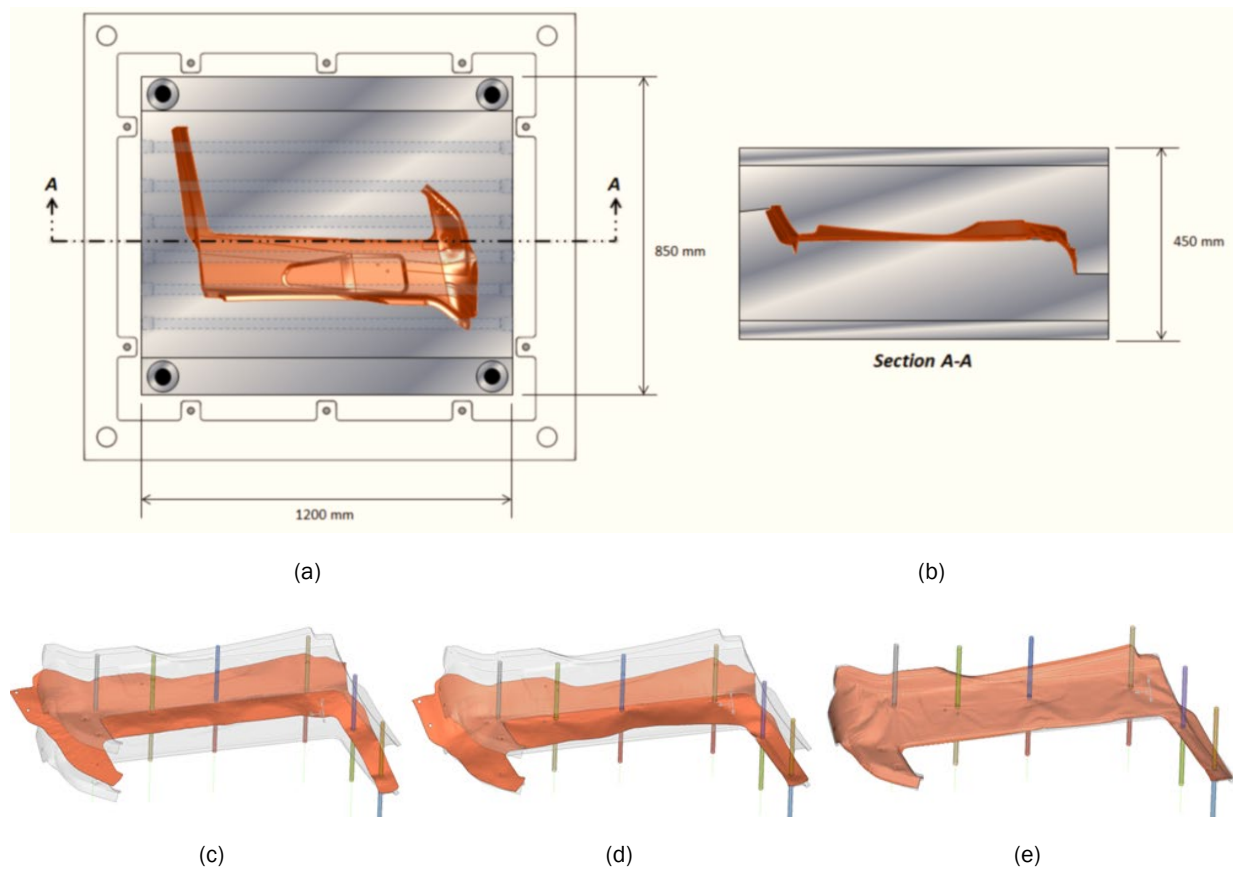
(a) Initial tool concept of the inner beltline stiffener. (b) Thermoforming simulation of the inner beltline stiffener. (c) Before forming. (d) Cavity driver touch lower tool. (e) Tool closed condition. Source: Clemson University.
